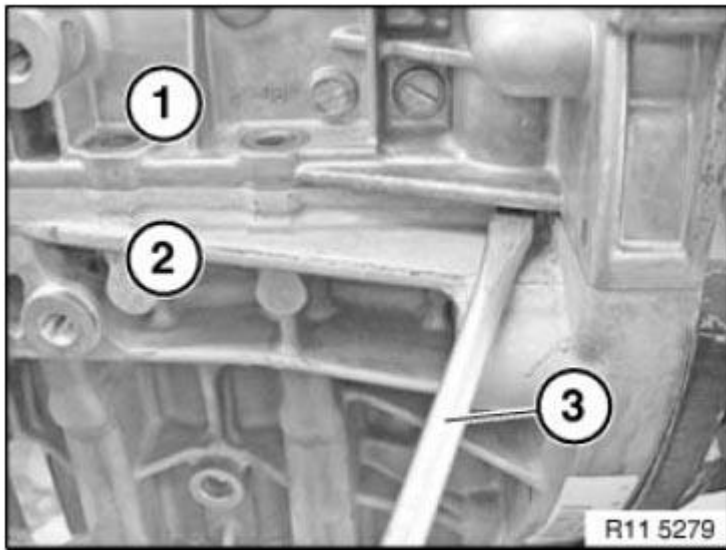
Removing Crankcase Lower Section From Upper Section Using Tool
